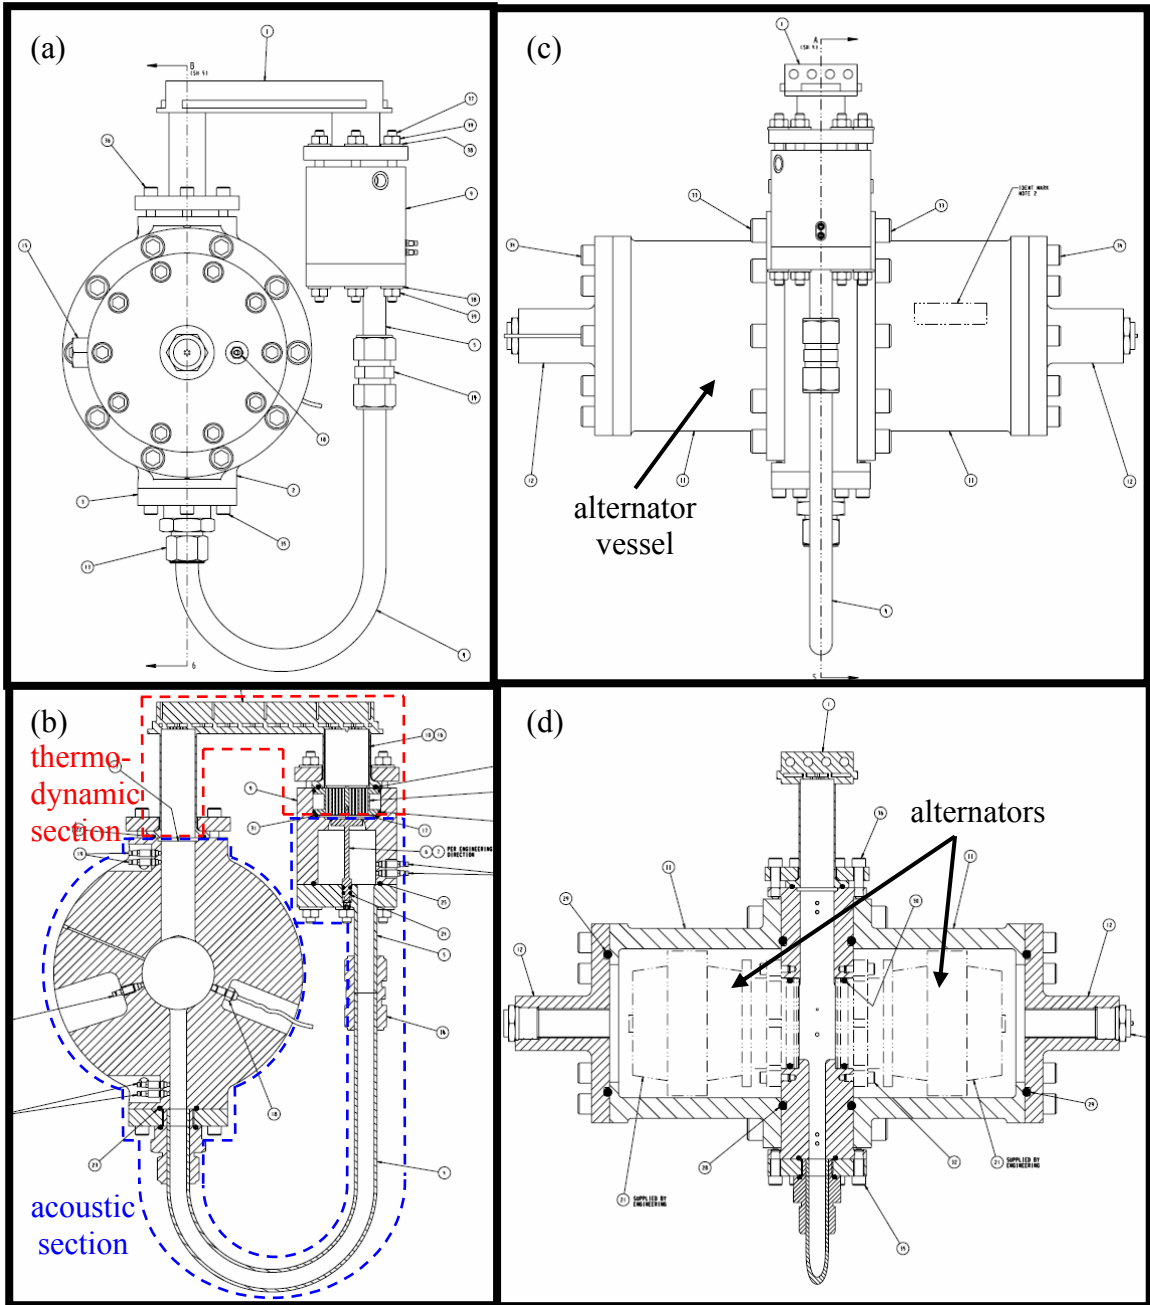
TAPC drawings: (a) front view and (b) cross-section, (c) side view and (d) cross-section
